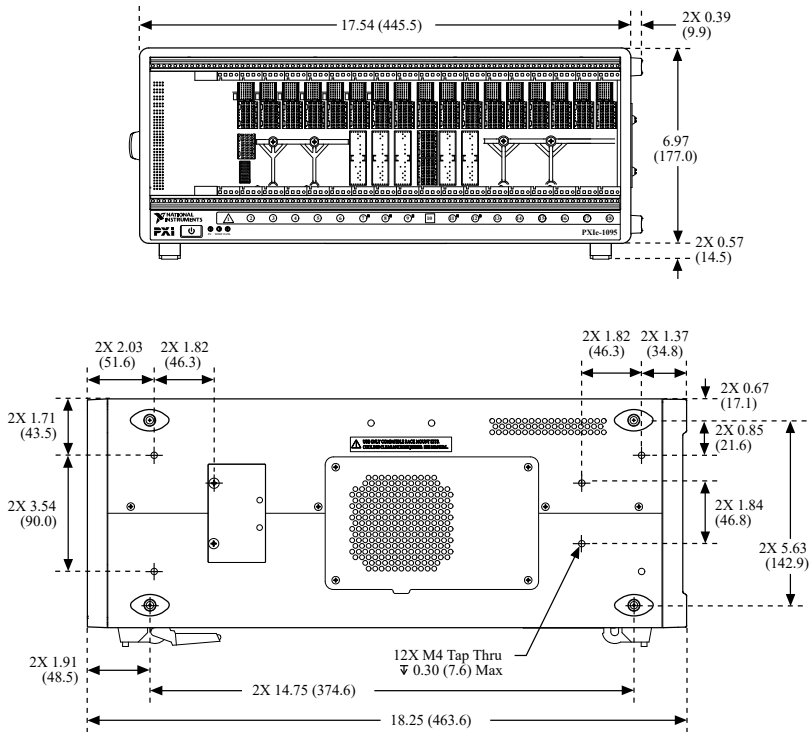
PXle-1095 Chassis Dimensions (Bottom)
